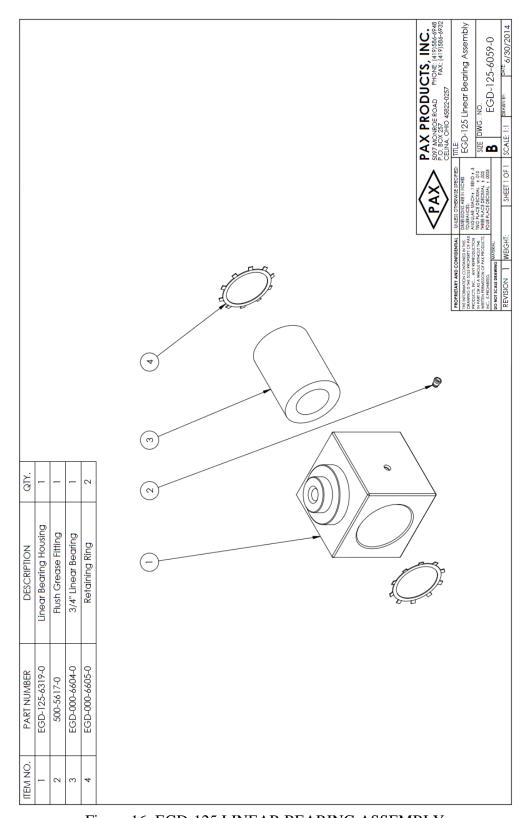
EGD-125 LINEAR BEARING ASSEMBLY
